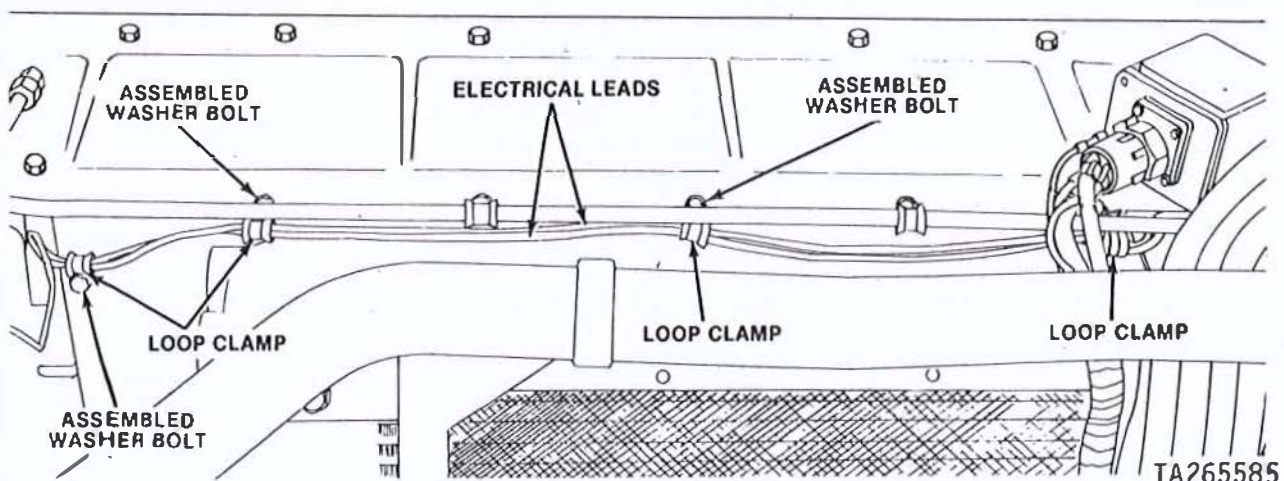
Removing or Installing Starter, Smoke and Dust Detector Electrical Cable
